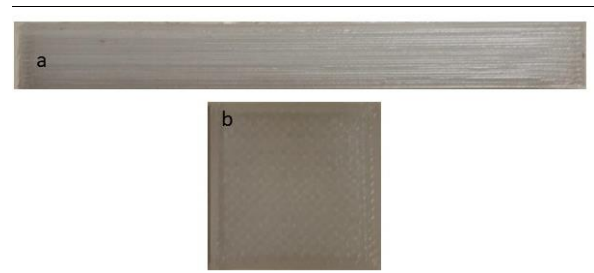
Produced test samples by 3D printer; a) 3 Point bending b) Wear
